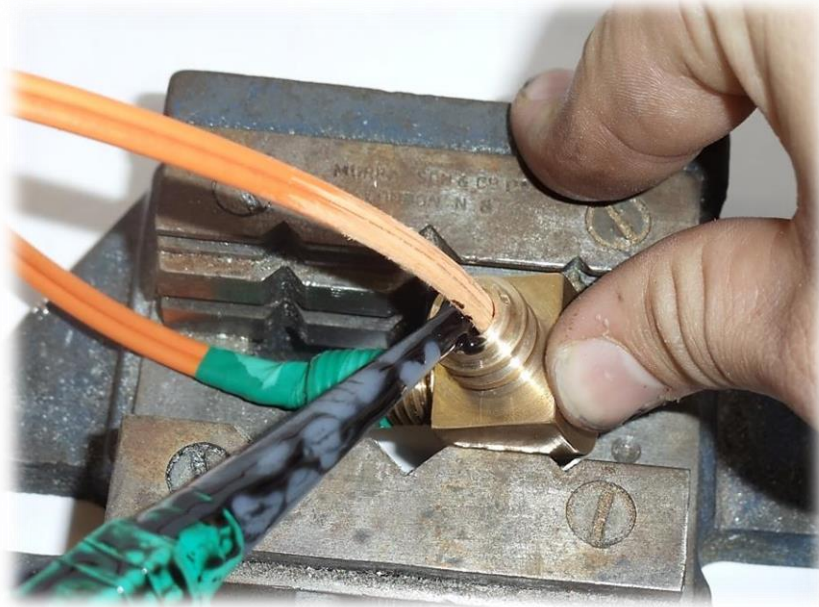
Photo of the penetrator being filled with polyurethane potting compound
